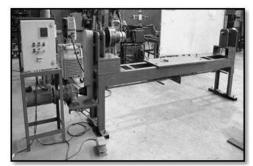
Photographic view of Semi-automatic welding positioner
